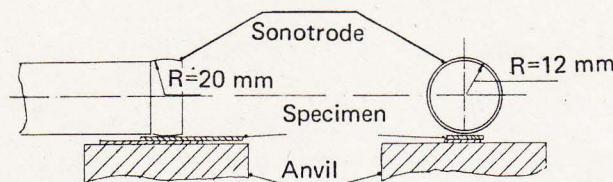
A possible arrangement for ultrasonic welding of sheets.
